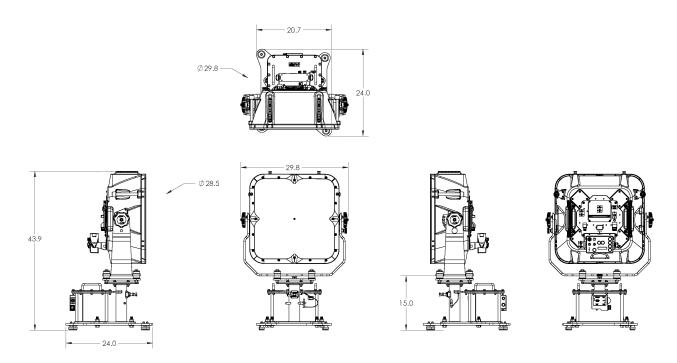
LRAD-500X-RE MMT Total System Dimensions – HH-60
